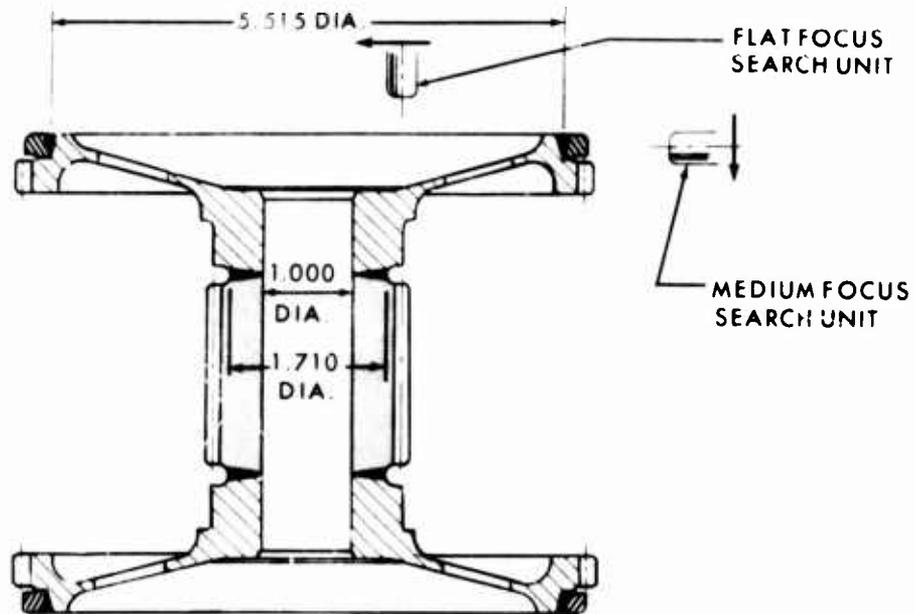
Ultrasonic Inspection, First-Row Pinion.
